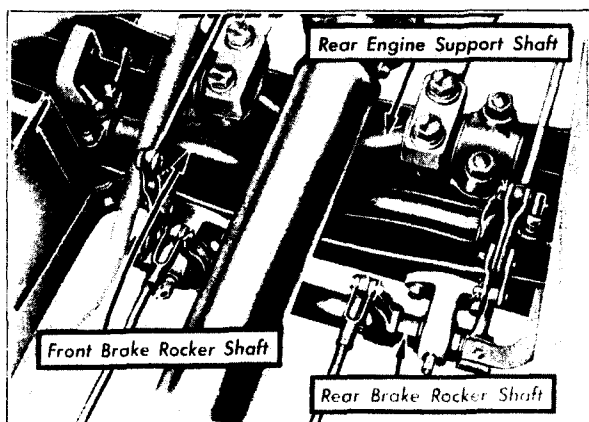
The 355 brake rocker shafts are arranged as on the V-16.
